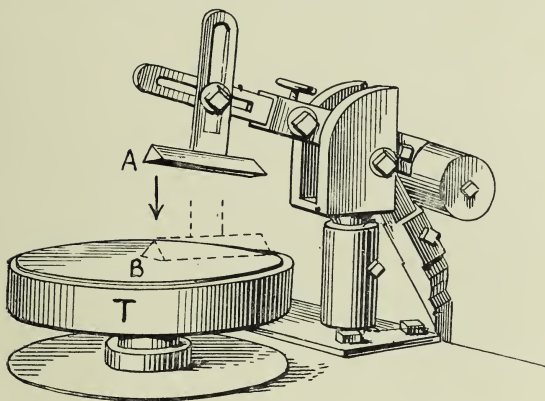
Flattening out clay for a Saucer.—T is the revolving table ;
